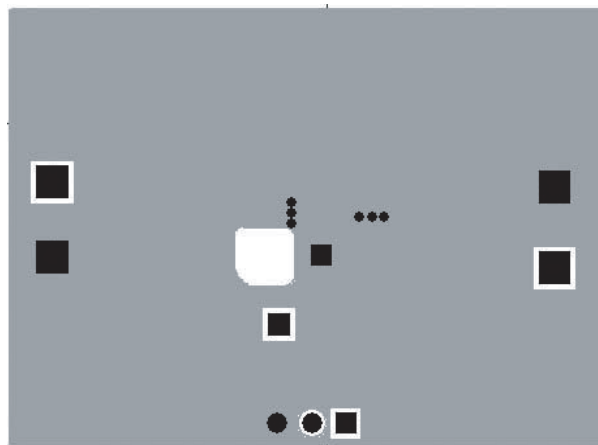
AAT1145 Evaluation Board PCB Bottom Side.
